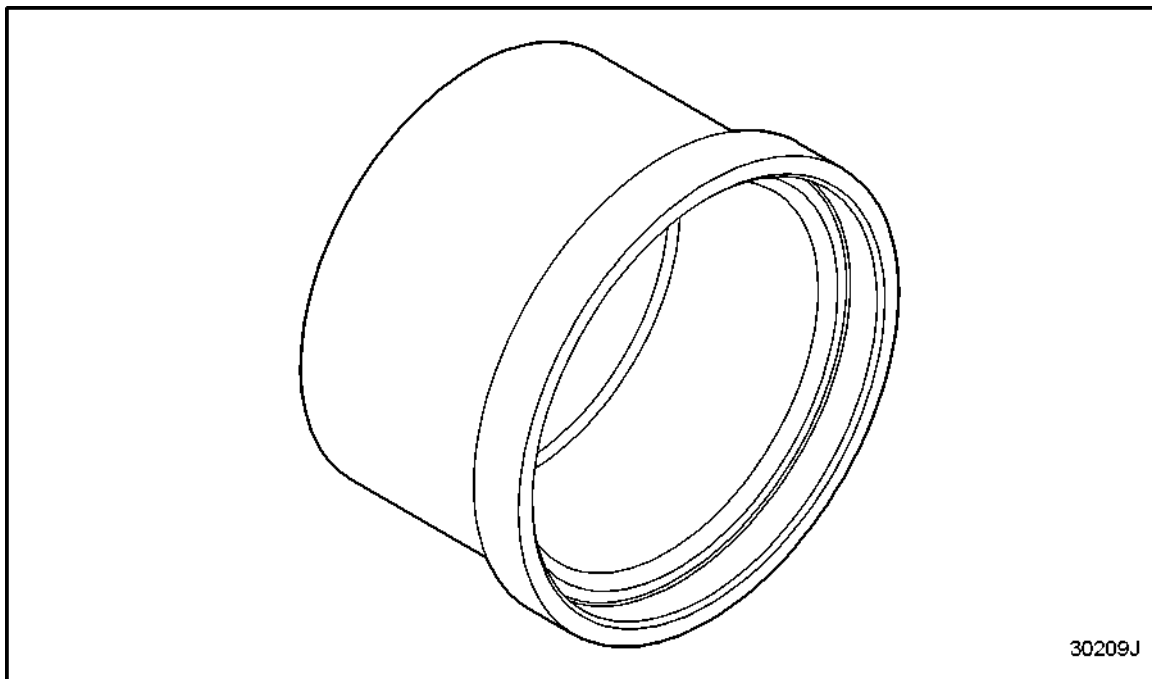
Front Wear Sleeve Installer,J 42257
